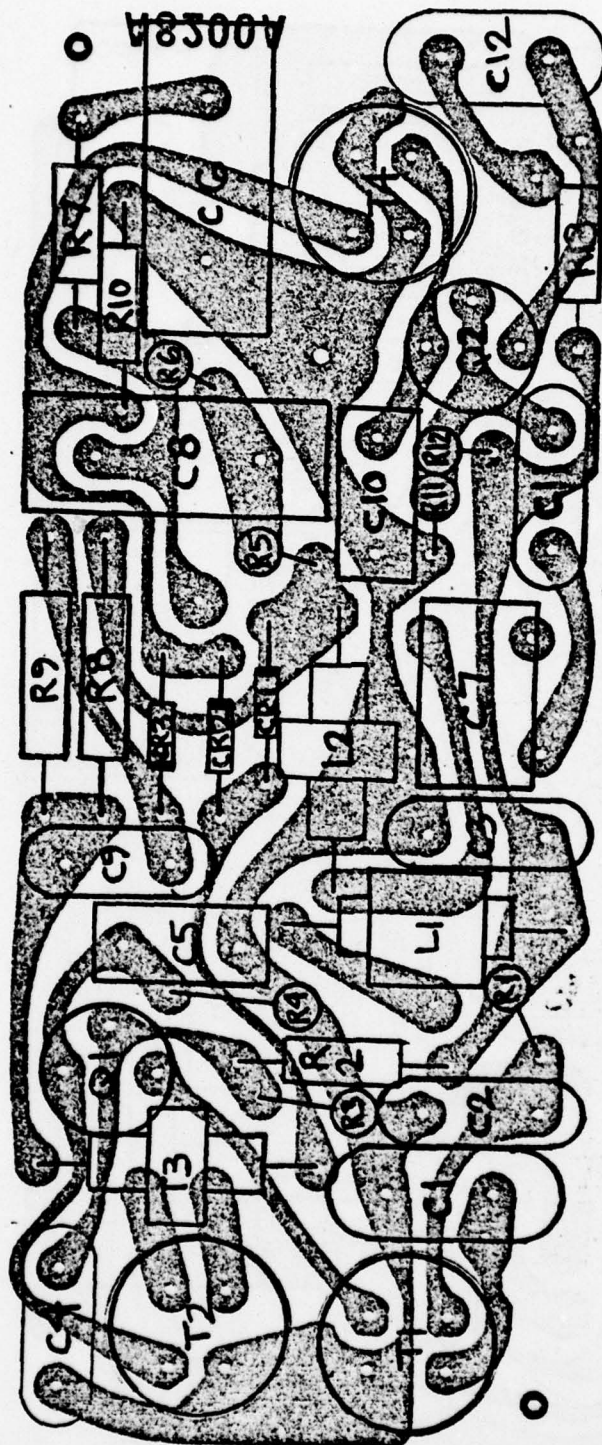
P.C. BOARD LAYOUT FOR THE A8200A TRANSMITTER PHASE DISCRIMINATOR ASSEMBLY
